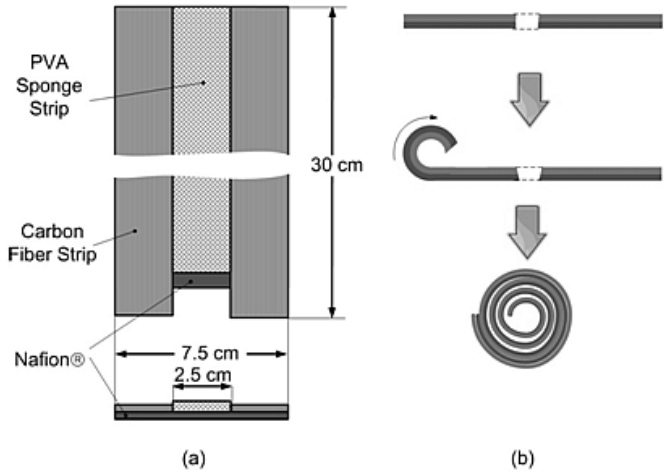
Fabrication of the rolled insert for the thermoelectric cell: (a) assembling of composite strip; (b) rolling of insert.
